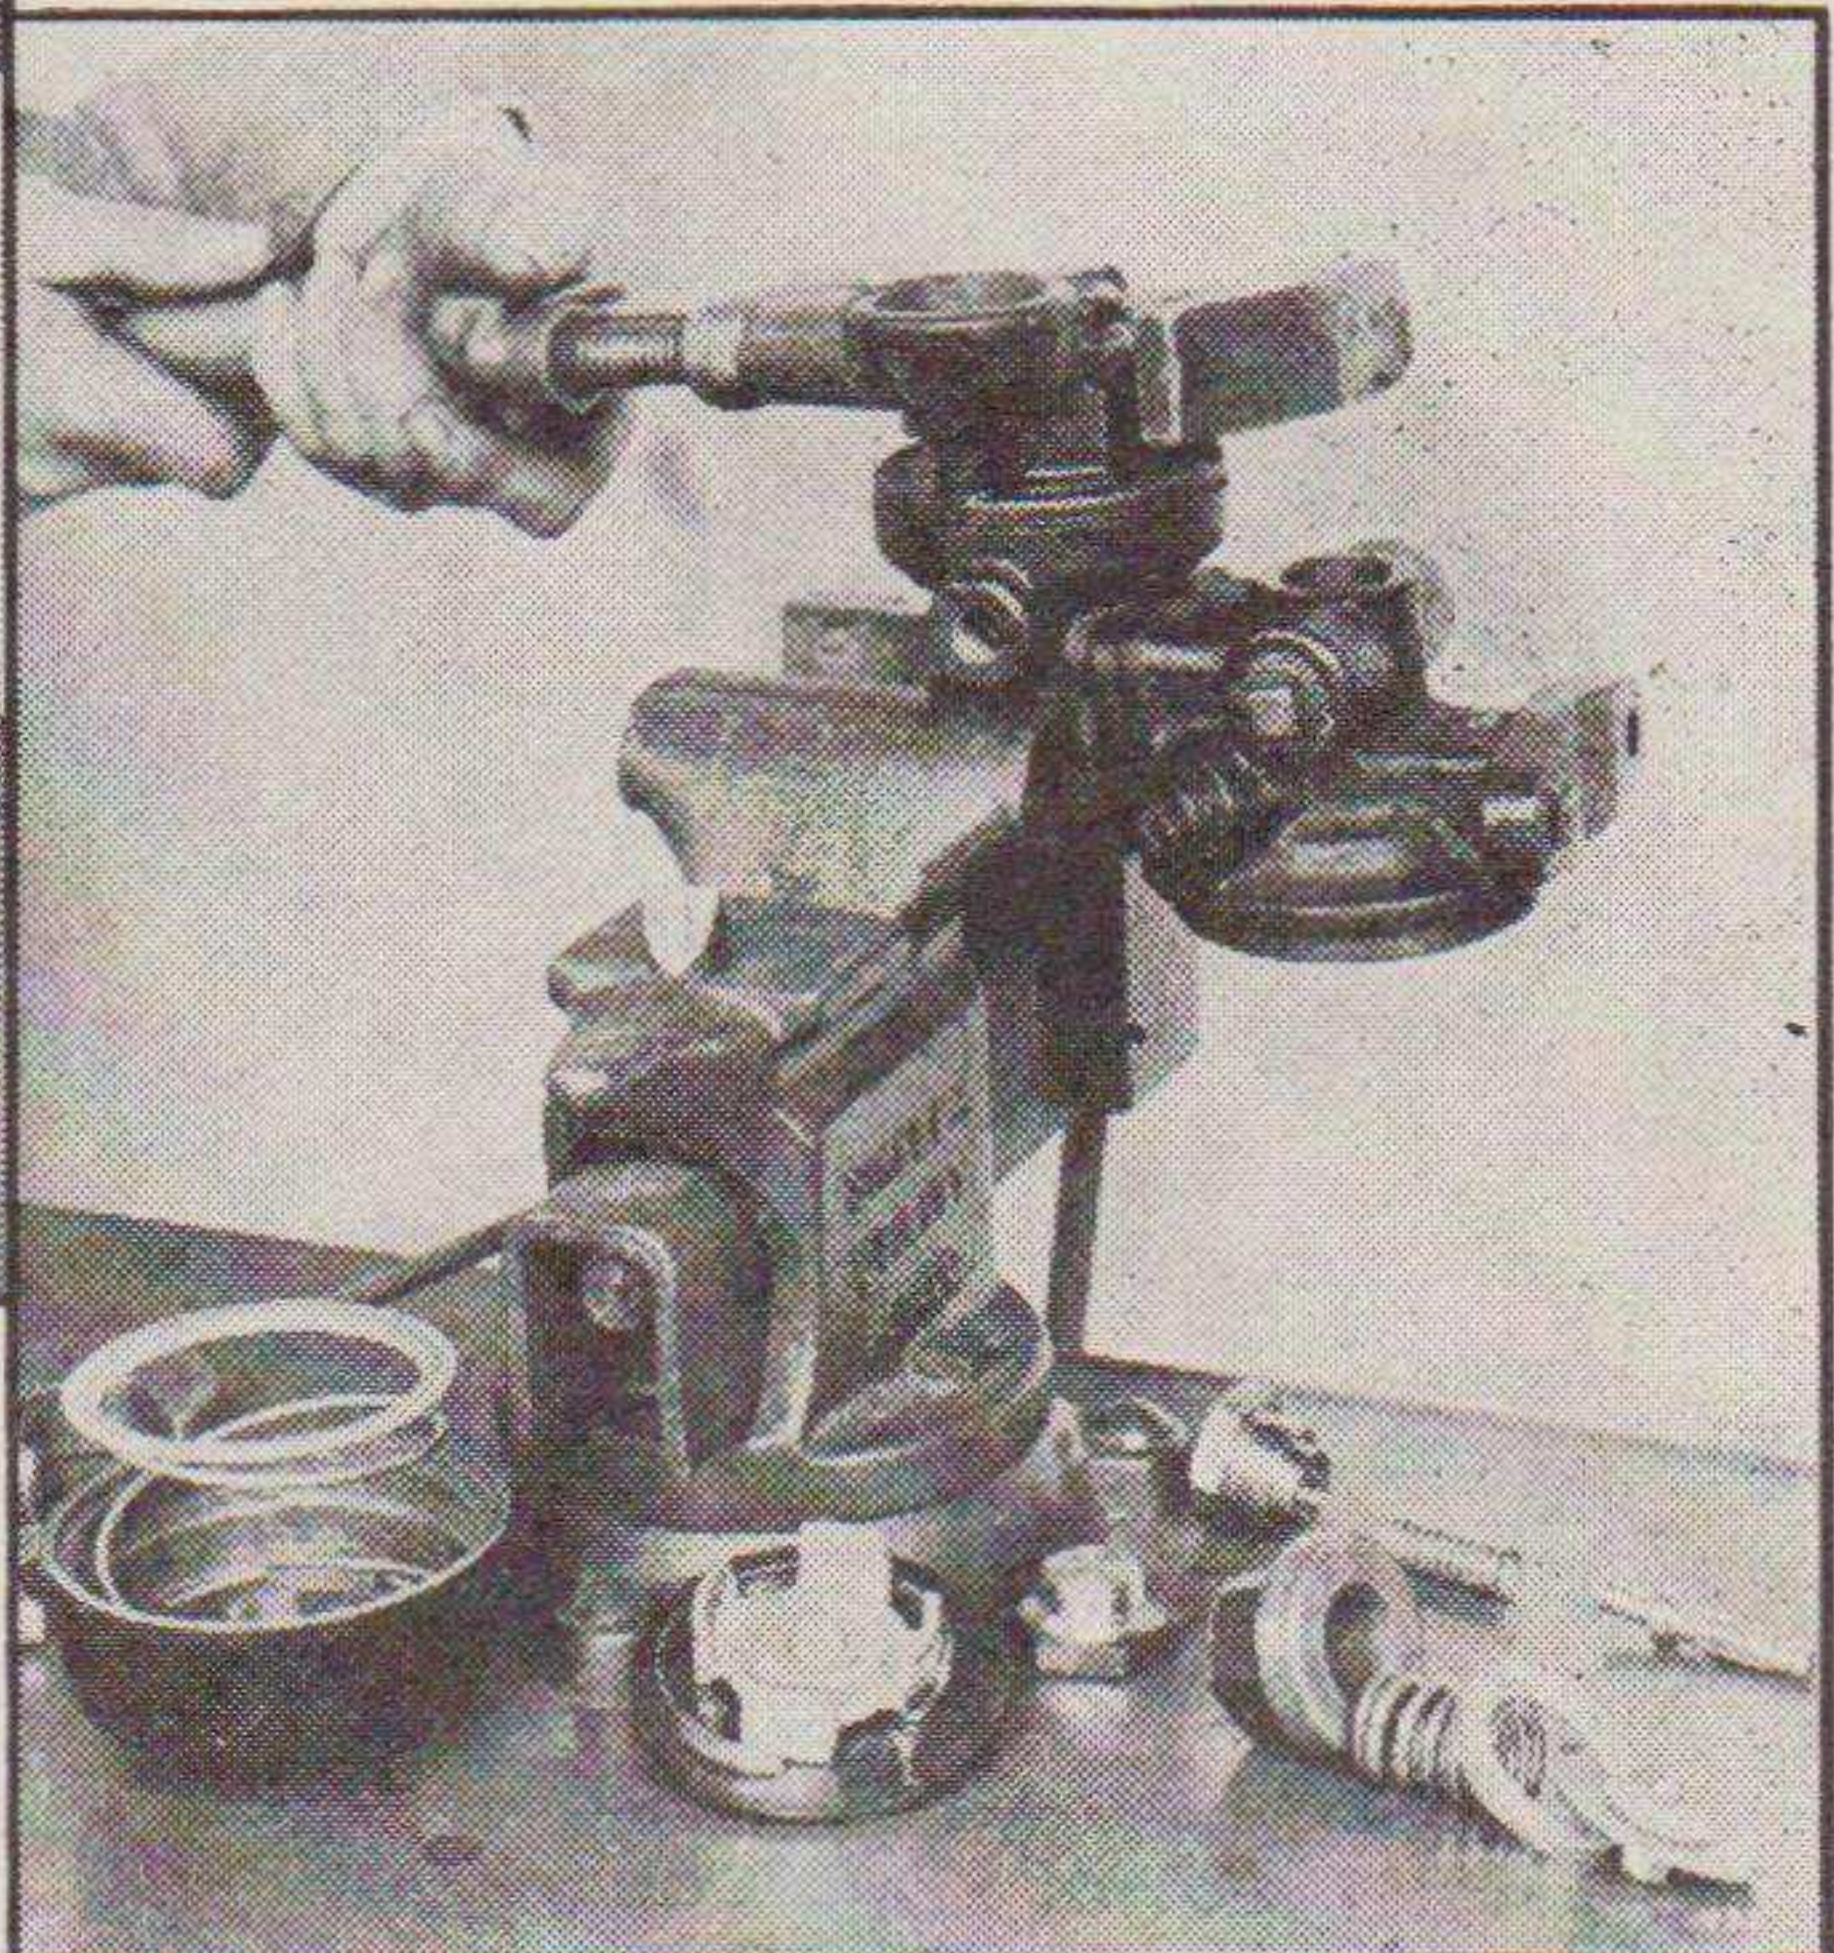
REMOVING DIAPHRAGM COVER BODY
